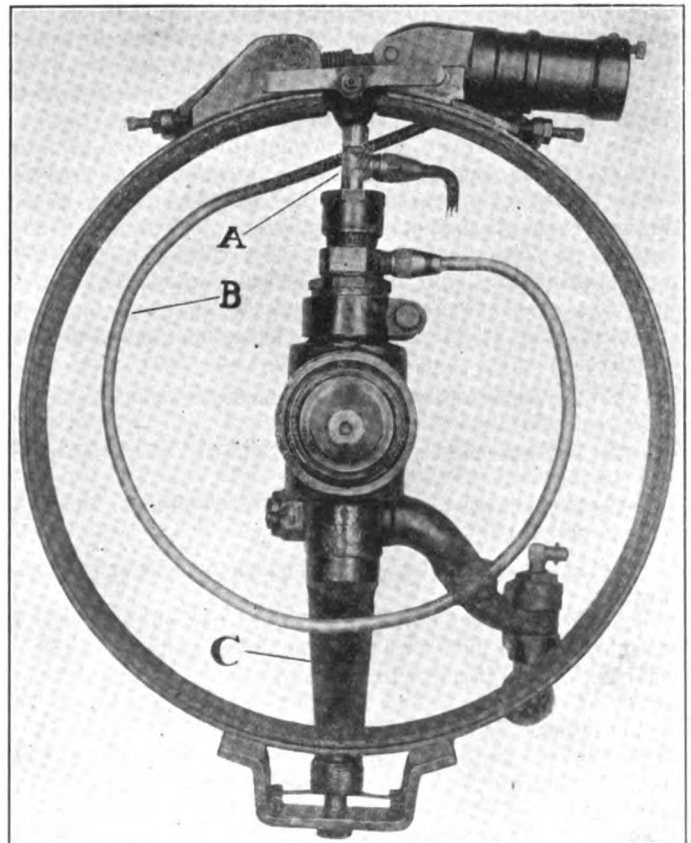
DETAILS OF CONSTRUCTION SHOWING THE RELATIVE POSITIONS OF THE SWIVEL JOINT, THE KNUCKLE-PIN AND THE COIL THAT TAKES UP THE BAND MOVEMENT
